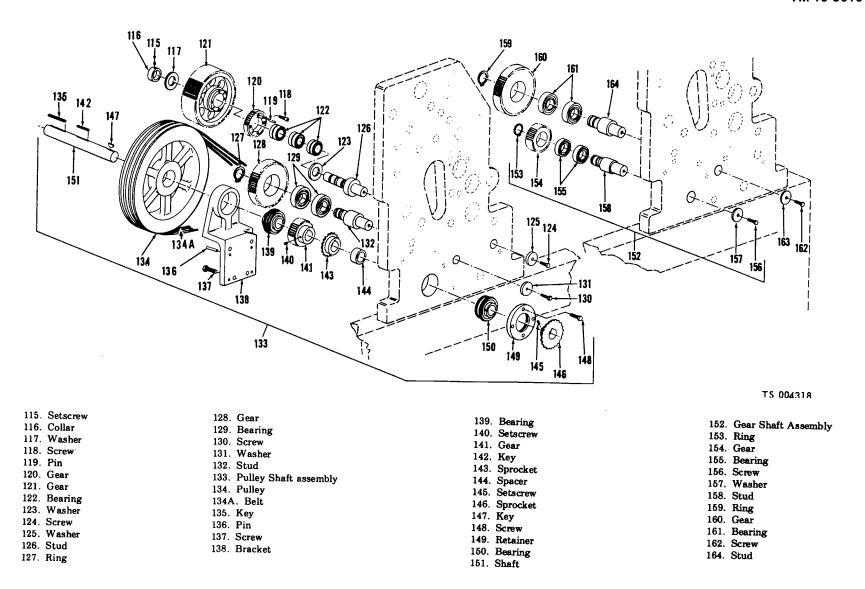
Cylinder and main drive assembly (Sheet 4 of 5).
